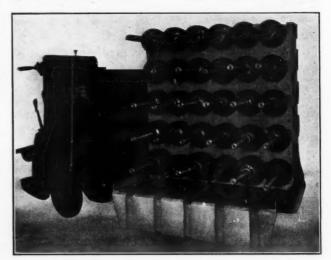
Industrial-Truck Skid With Specially Designed Rack for Handling Assembled Motor Rotors
